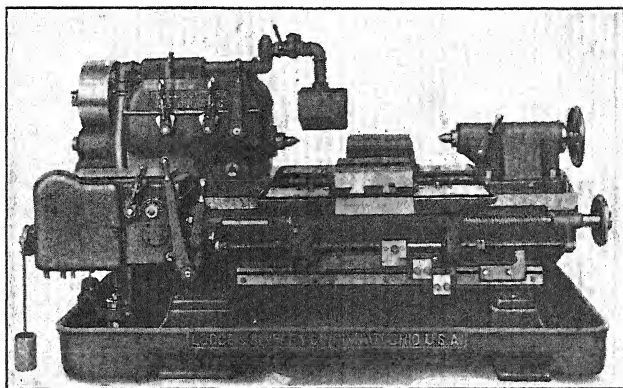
The Lodge and Shipley "Duomatic" Lathe Adapted to Quantity Production of Lathe Work Held Between Centers, on an Arbor, or in Suitable Holding Fixtures.
